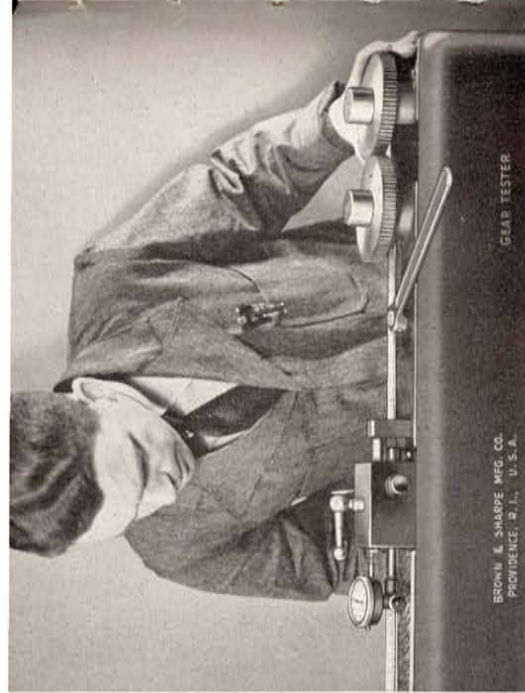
Testing Gears for Accuracy of Tooth Form, Pitch Diameter, and Concentricity
